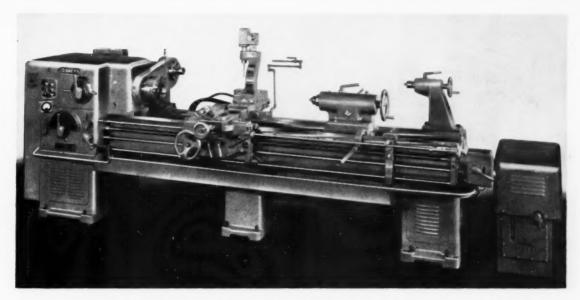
Sidney fluid tracer lathe equipped with rotating drive for template or master part used in the production of duplicate pieces
